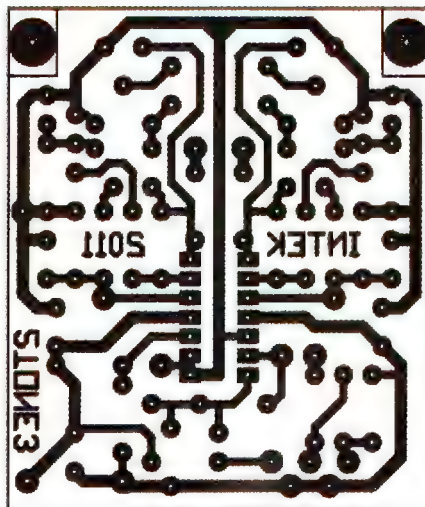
The PCB. NOTE: Exact size is 2.20 x 2.60 inches (55.88 mm x 66.04 mm)
